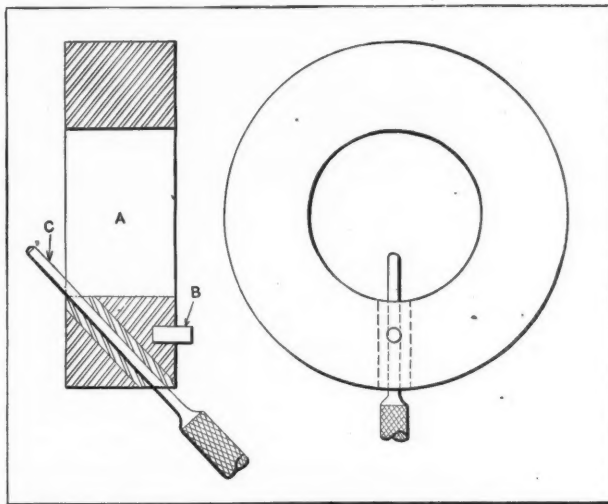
Gage for locating Angular Hole drilled in Stem of Fuse Body
